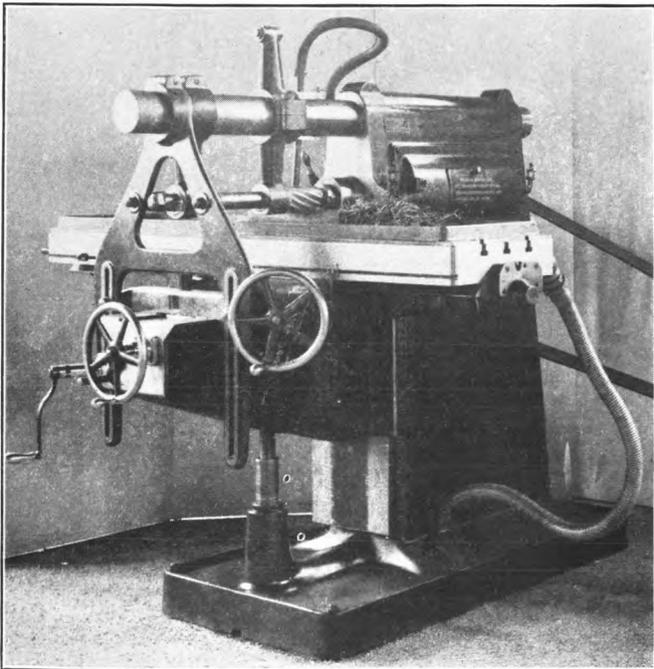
MILLING MACHINE, WITH UNGUARDED CUTTER.
